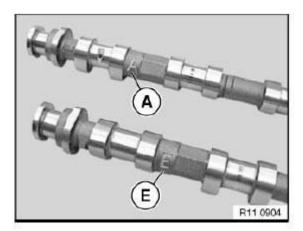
Identifying Exhaust Camshaft And Intake Camshafts
